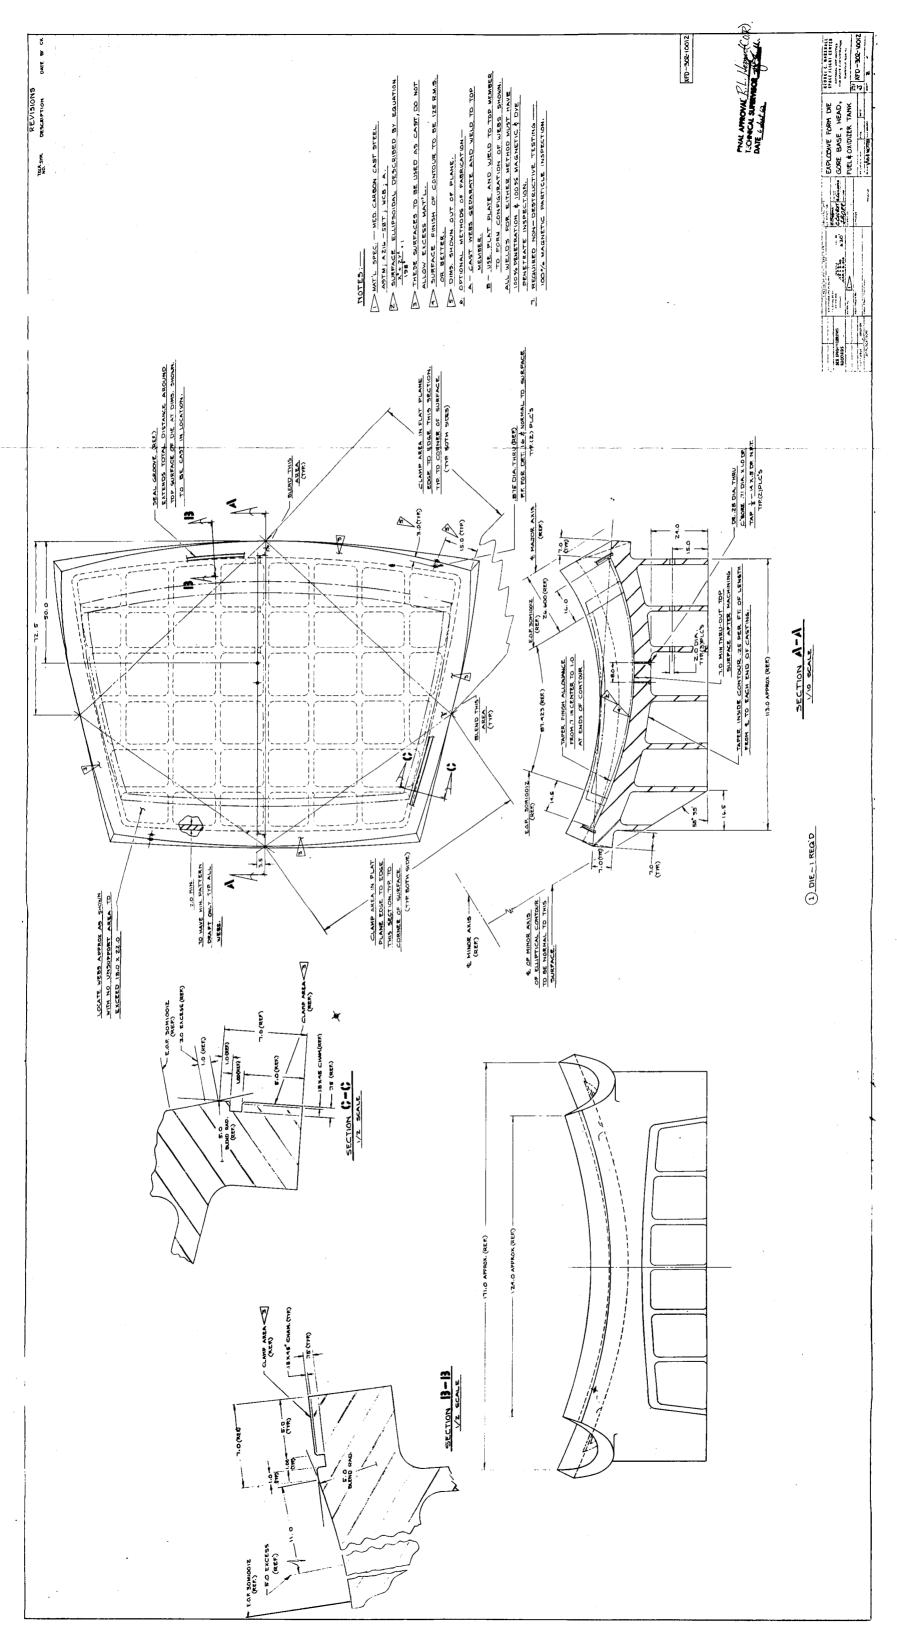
EXPLOSIVE FORM DIE-GORE BASE
